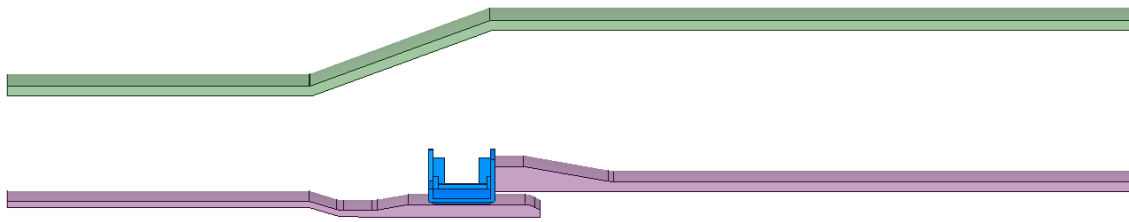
Assembly of belt seal domain extended by cylindrical surfaces
